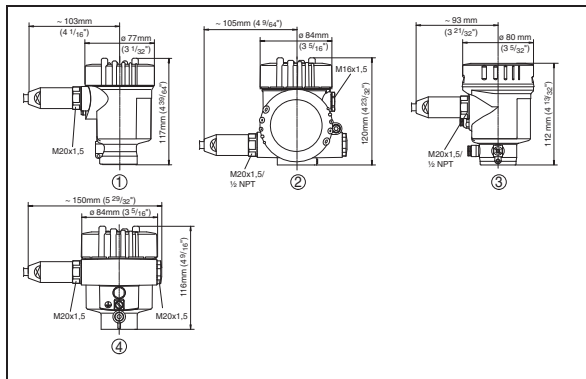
Housing versions in protection IP 66/IP 68, 1 bar (with integrated indicating and adjustment module the housing is 9 mm/0.35 in higher)
